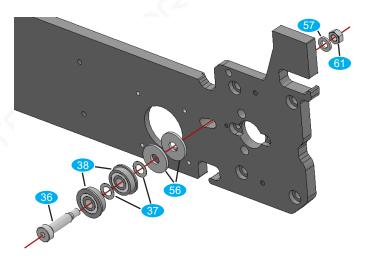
Mounting the tension pulley (surrounding components are not shown for clarity)
